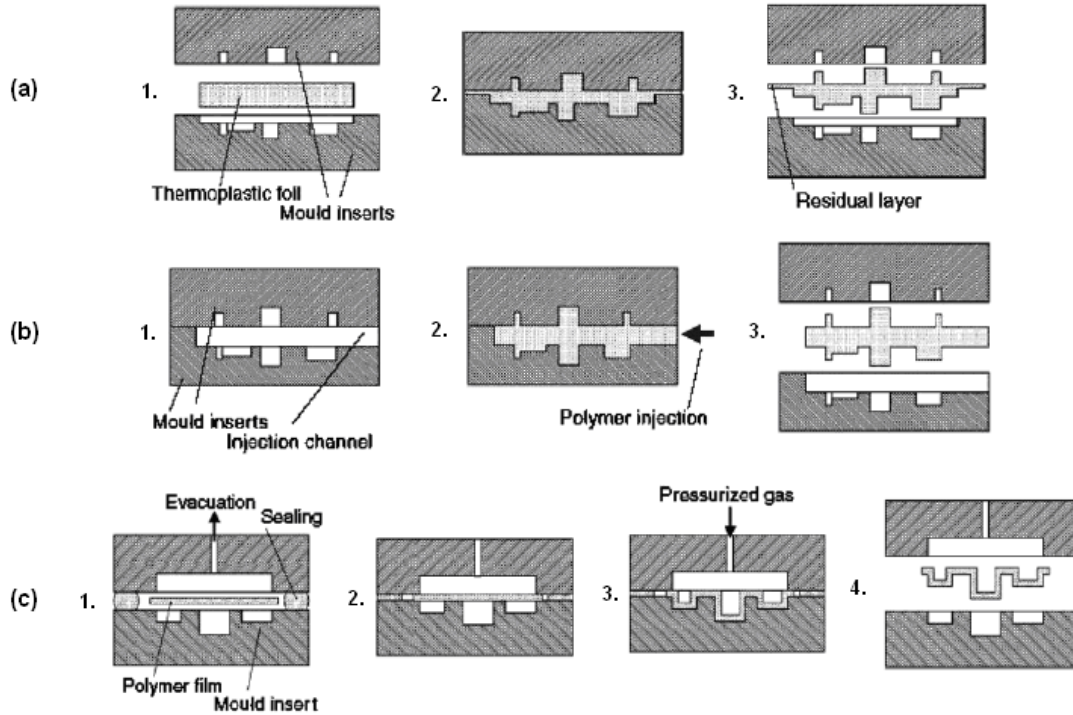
Process details of replication technique. (a) embossing; (b) liquid injection; (c) thermoforming [101].
